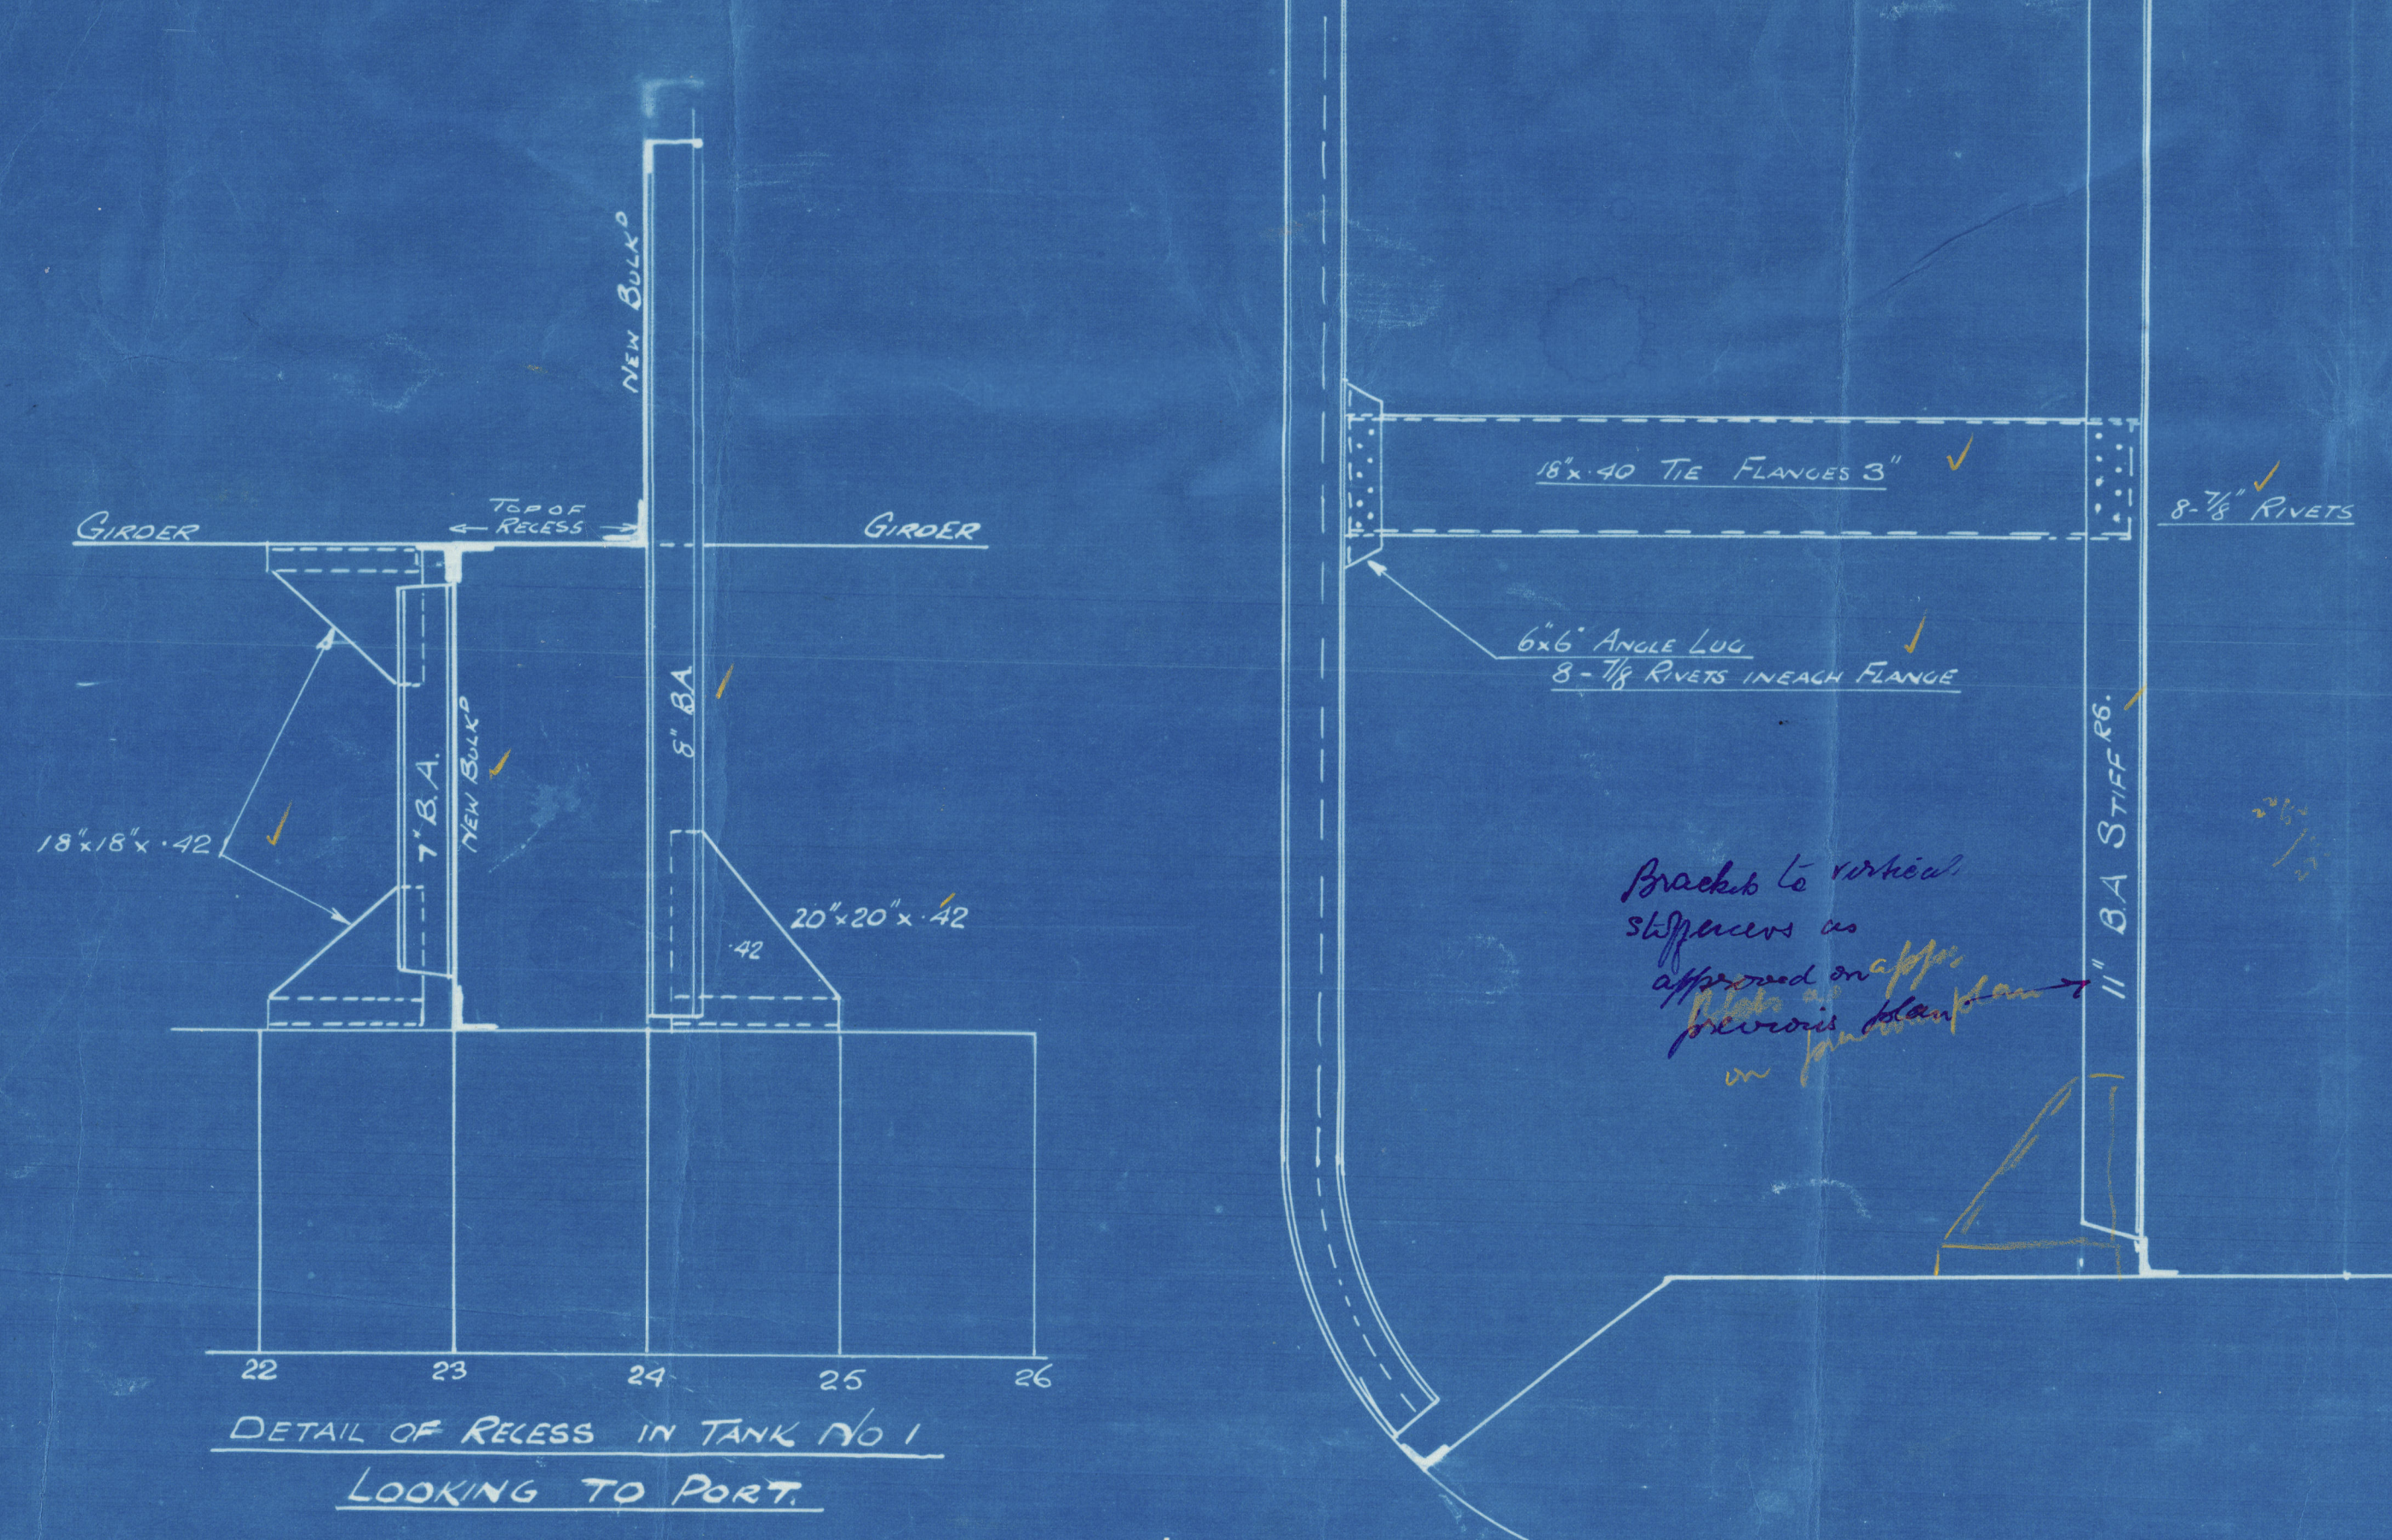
DETAIL OF GIRDER BETWEEN PUMP ROOM & TANK D
